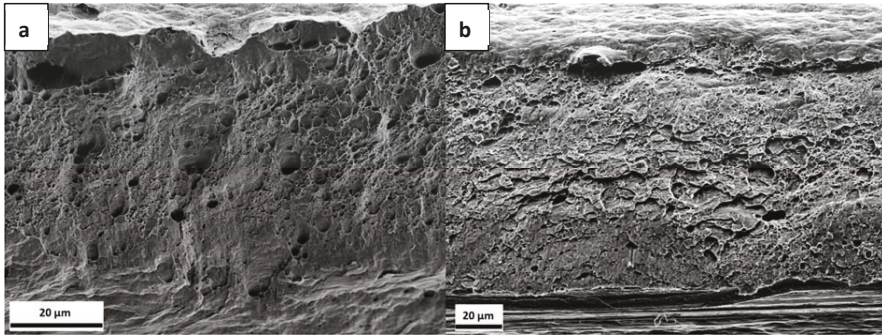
Fracture surfaces of the (a) uncharged and (b) charged and discharged CP steel specimens.
